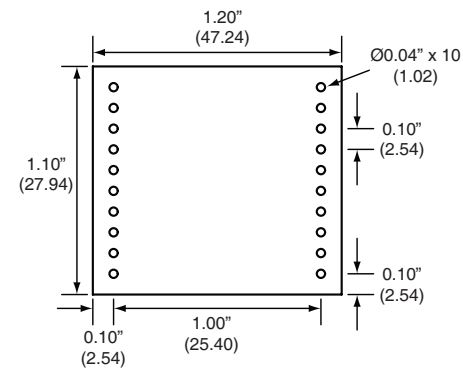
EVM-GNSS-TM PCB Layout Dimensions
